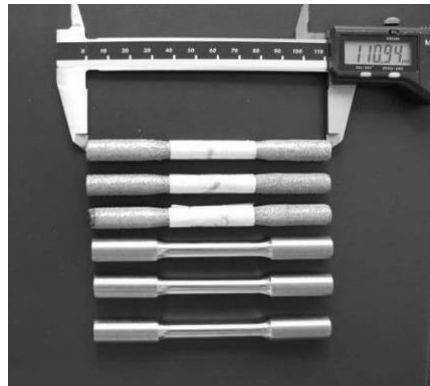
Ti-6Al-4V testing probes (LENS and "classic") for machining tests
